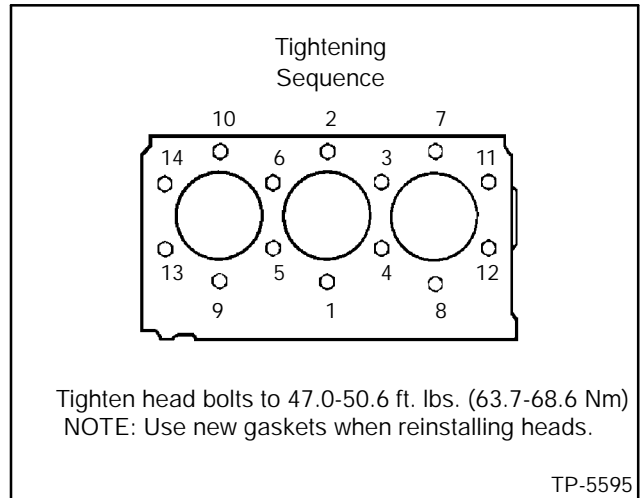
Cylinder Head Fastener, Tightening Sequence
